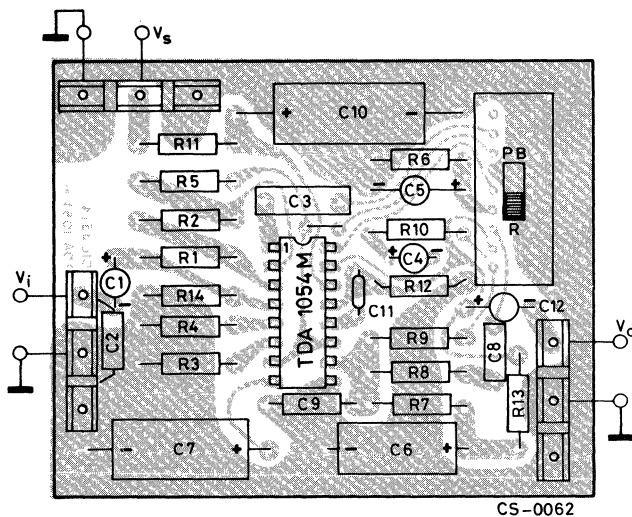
P.C. board and component layout for the circuit in fig. 18 (1:1 scale)
